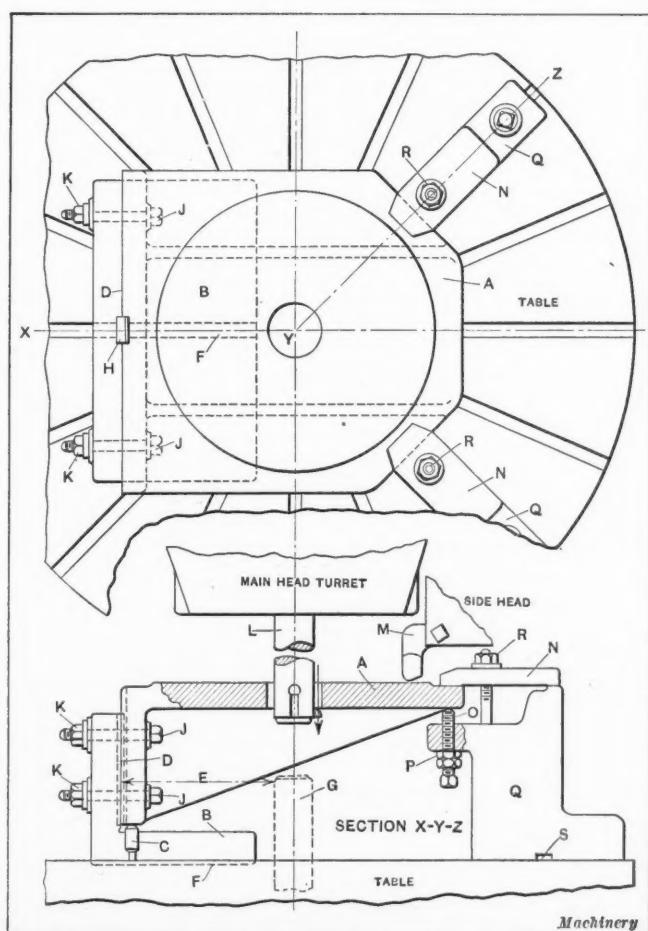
Inexpensive Fixture for holding Two Sizes of Brackets while being bored and faced
